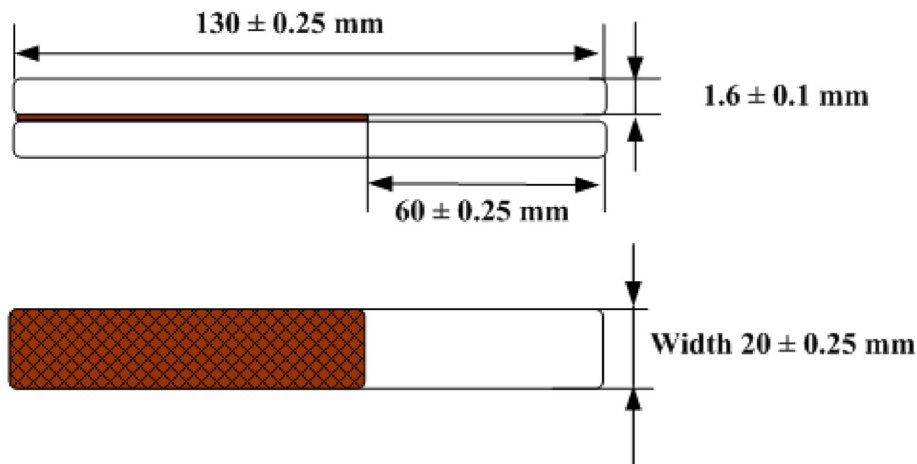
Dimensions of the samples and clamping method of the DCB test.
